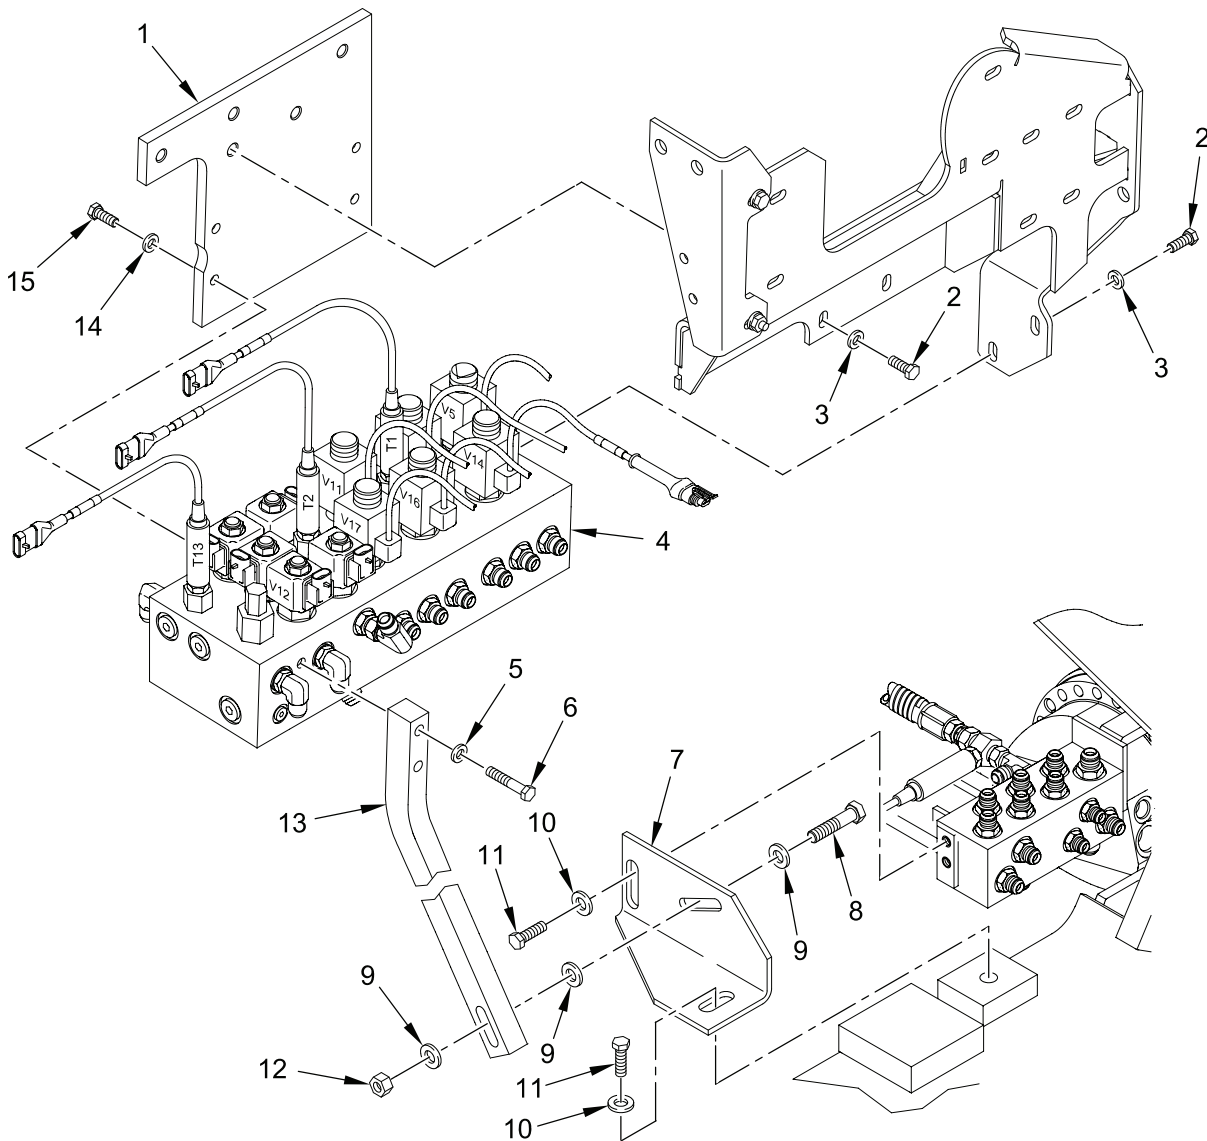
Removing HDC Primary Manifold Assembly and Mounting Bracket
